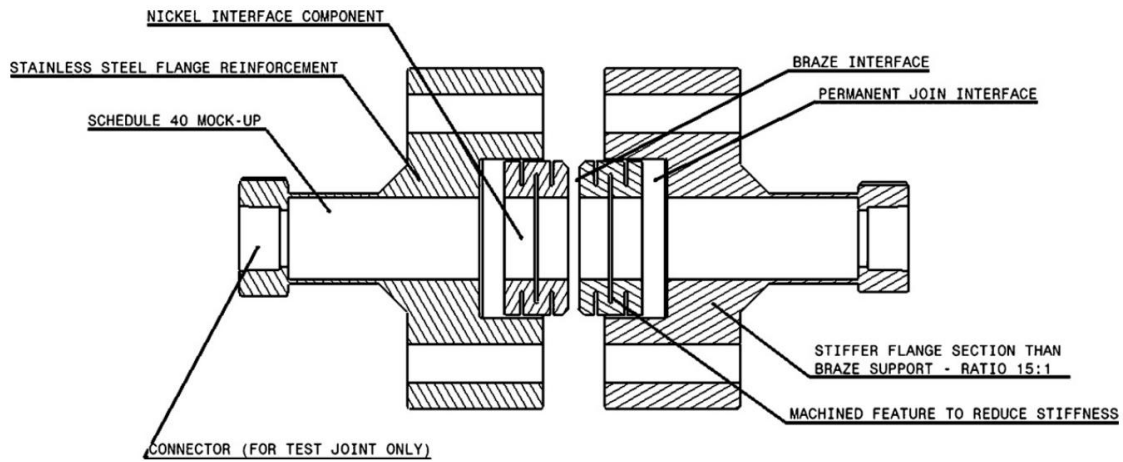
Concept of remote handling compatible pipe reversible brazing technique [13]
